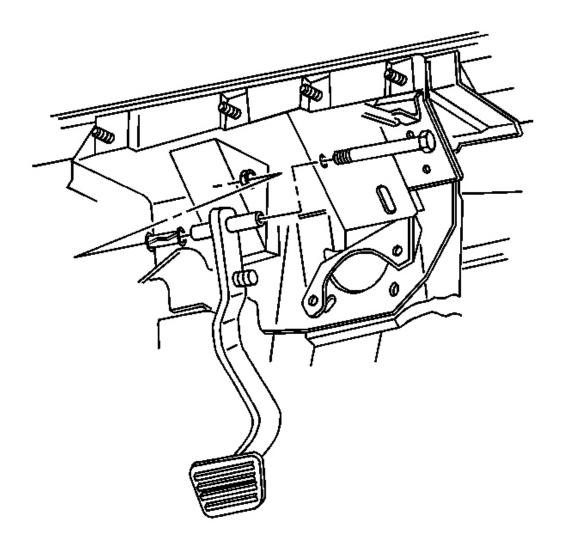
View Of Brake Pedal & Pivot Bolt Courtesy of GENERAL MOTORS CORP.
